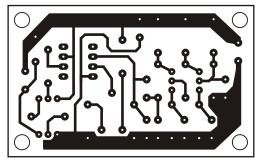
Actual - size, solder-side PCB layout of Receiver.
